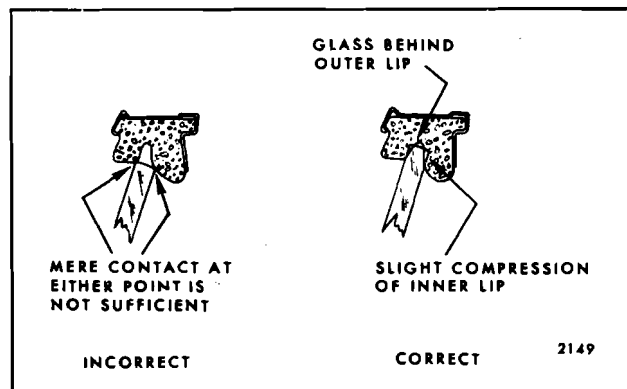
Window to Side Roof Rail Weatherstrip Alignment
